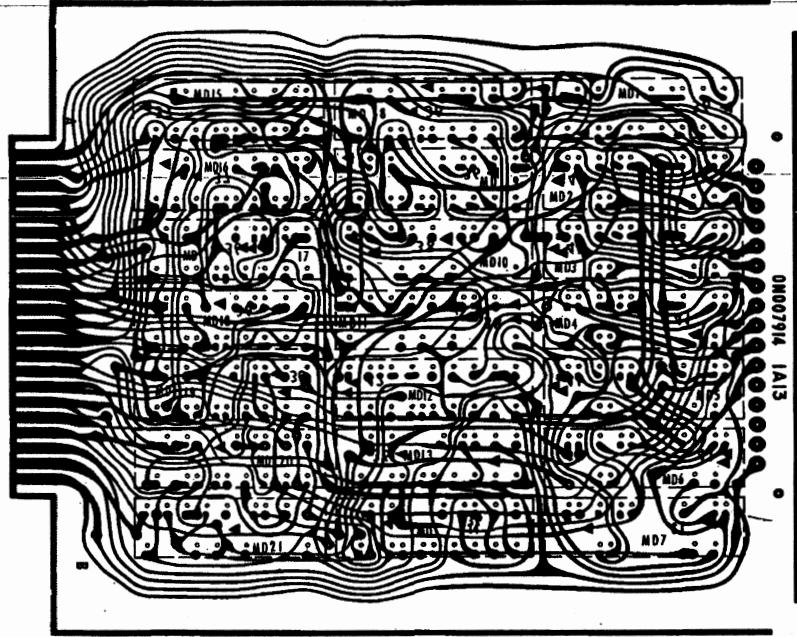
Card E-AJW Printed-Circuit Layout.
